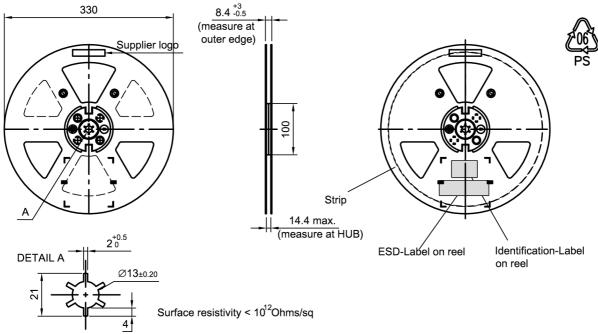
Drawing of reel (first-angle projection) with diameter of 330 mm.
